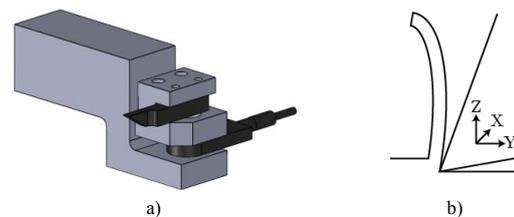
Cutting force measurement, showing a) Custom toolholder, and b) Cutting force directions
